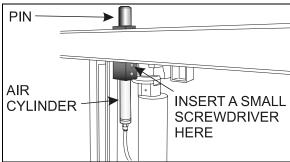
SECURITY PIN AIR CYLINDER REMOVAL
